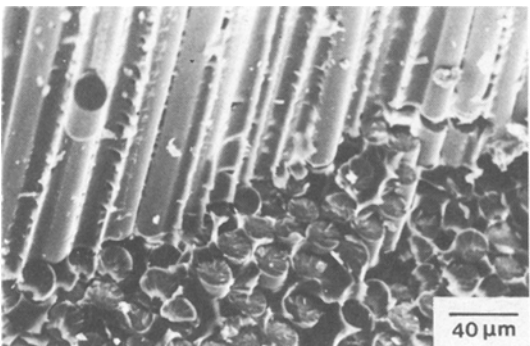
Detail of the steps on the fracture surface showing undercutting of the fibres at the base of the steps (tension insulator).
